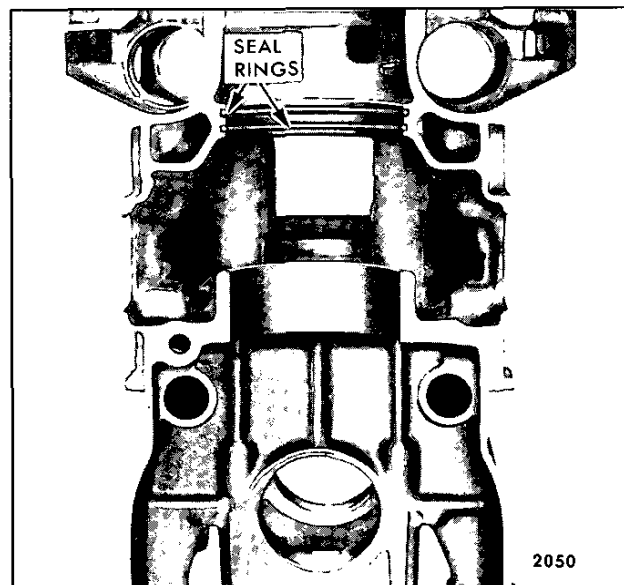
Cylinder Liner Seal Ring Location in Cylinder Block Bore
